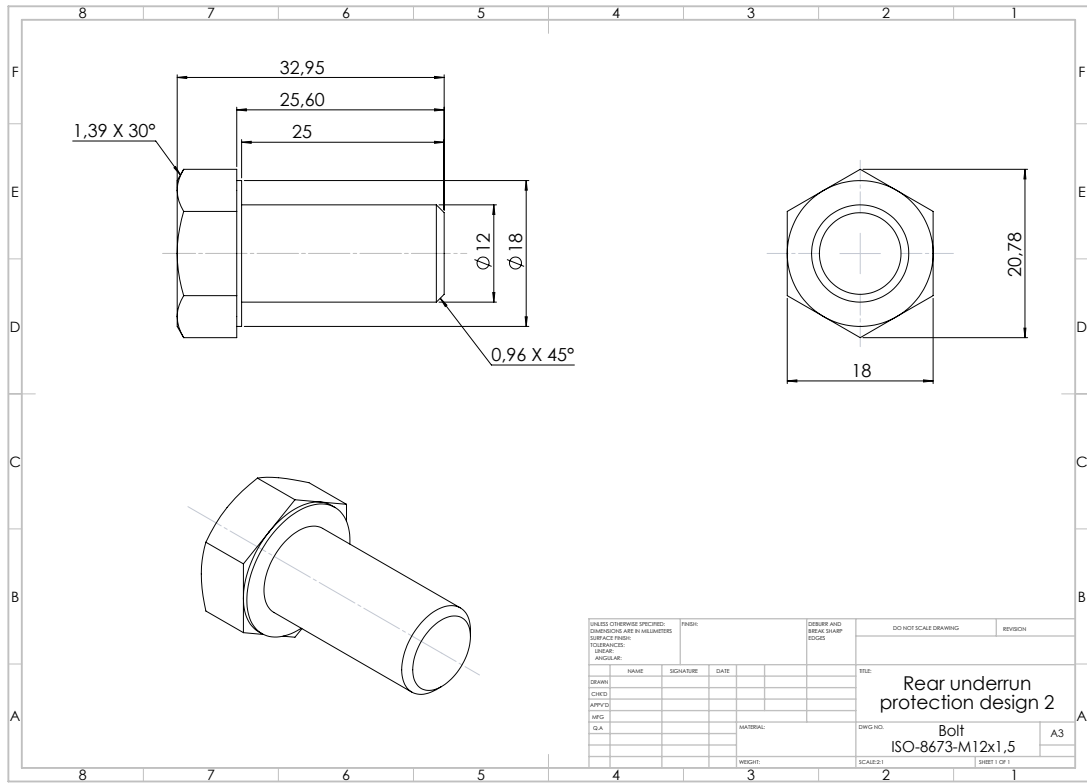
Dimensions of the bolt ISO-8673-M12
